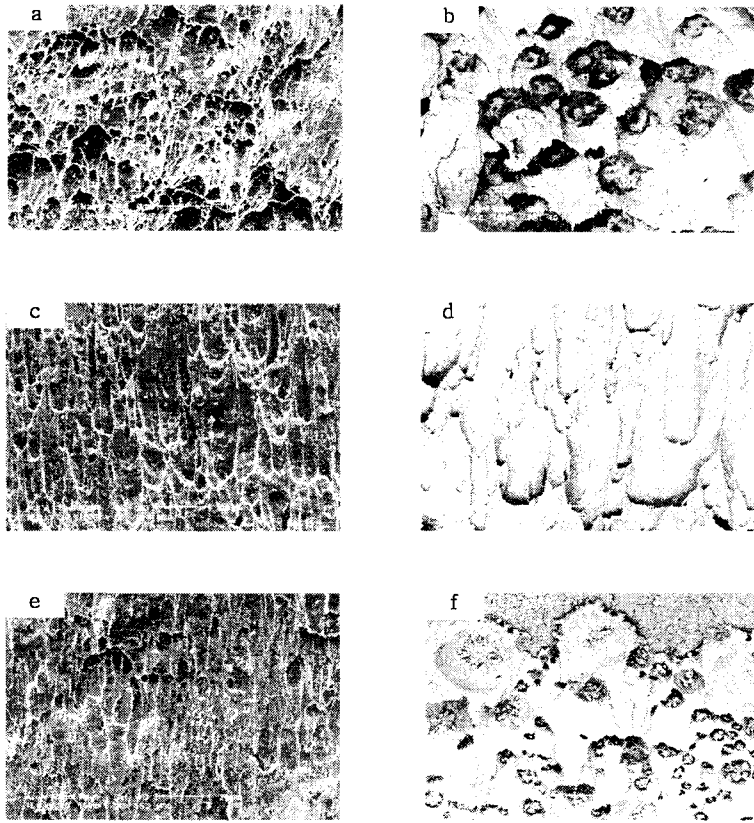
Fracture surface after ball shear test for solder/Cu pad joint (a,b), solder/electroless Ni-P/Cu pad joint (c,d), and immersion Au/Ni-P/Cu joint (e,f) : as-reflowed (a,c, and e) and after aging at 150°C for 100 days (b,d, and f).
